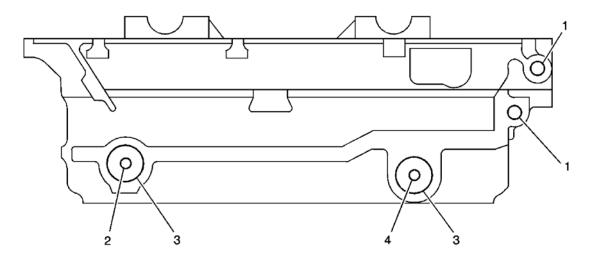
Cylinder Head Thread Repair - End View (Front) Courtesy of GENERAL MOTORS CORP.
